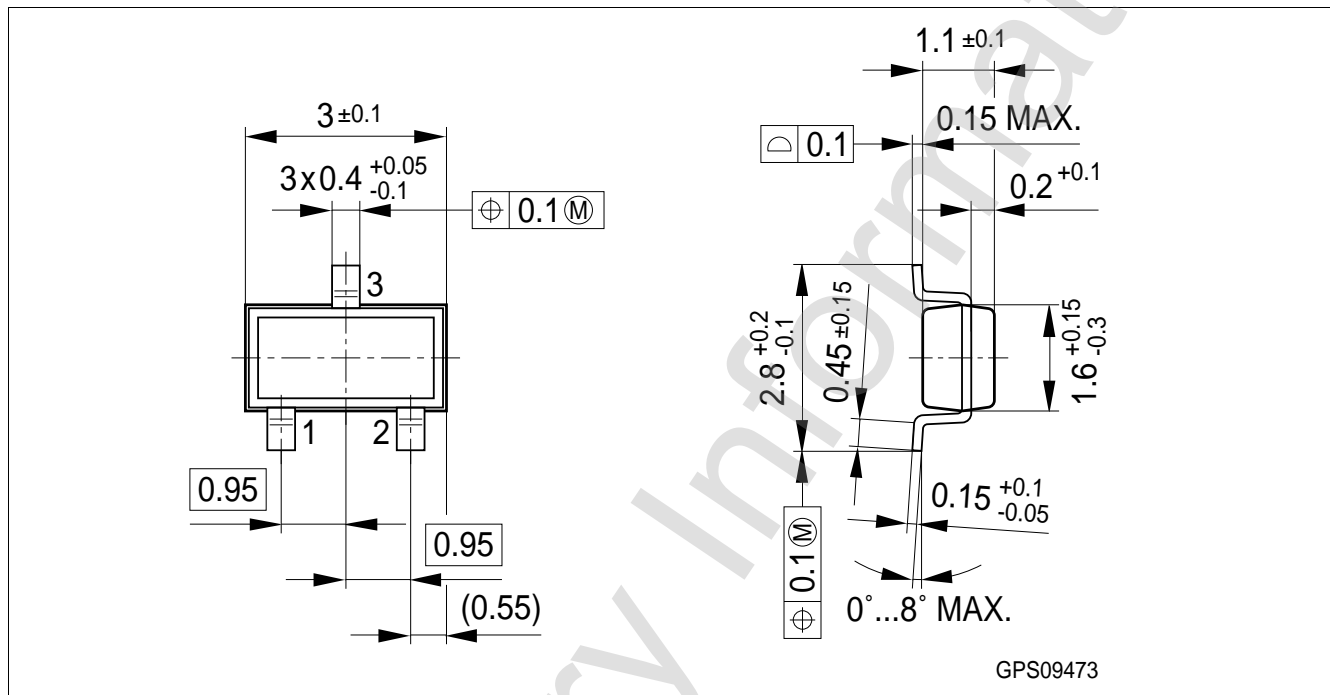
PG-SC59-3-5 Package Outline (All dimensions in mm)
